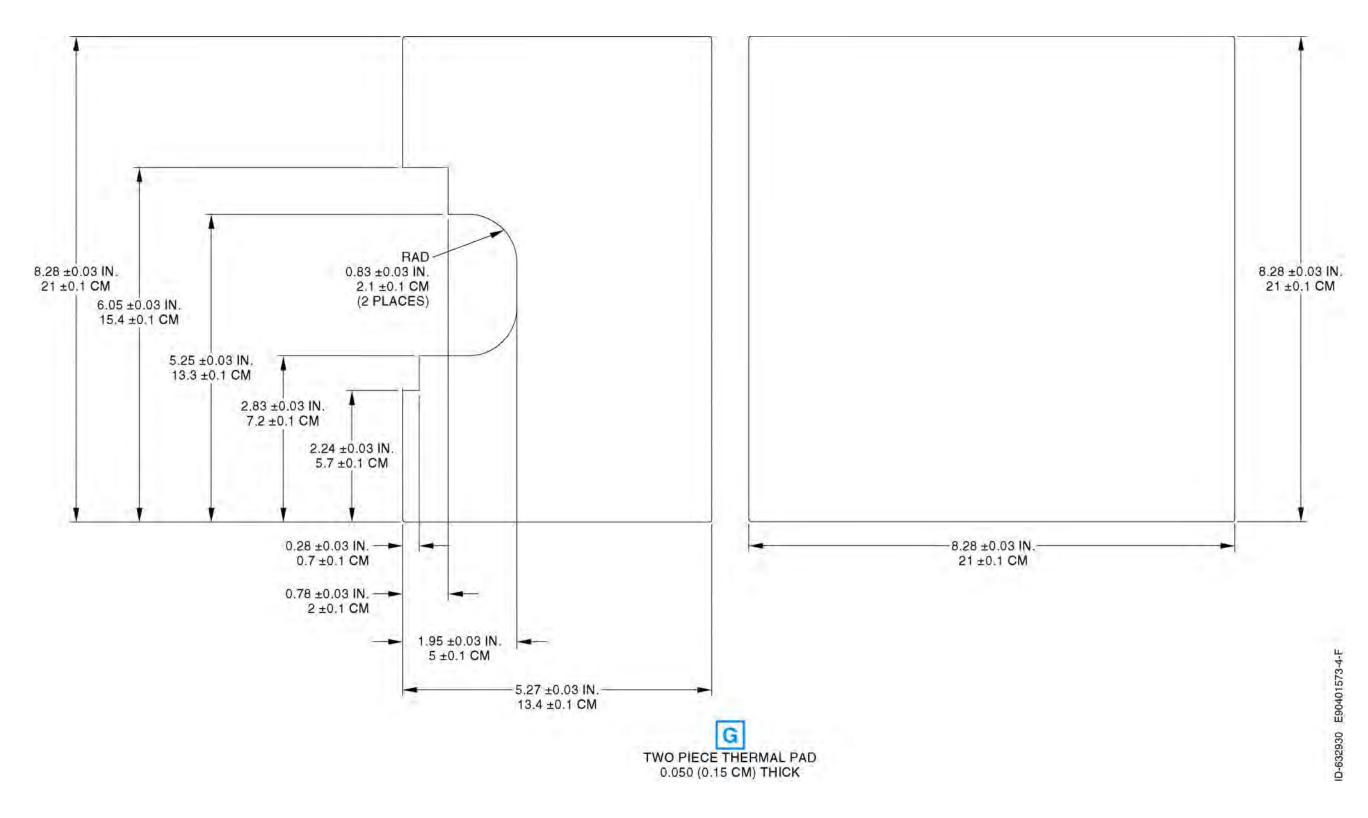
(Sheet 9 of 9) KRFU, Conduction-Cooled 1, Outline and Installation Drawing (90401573, REV F)
